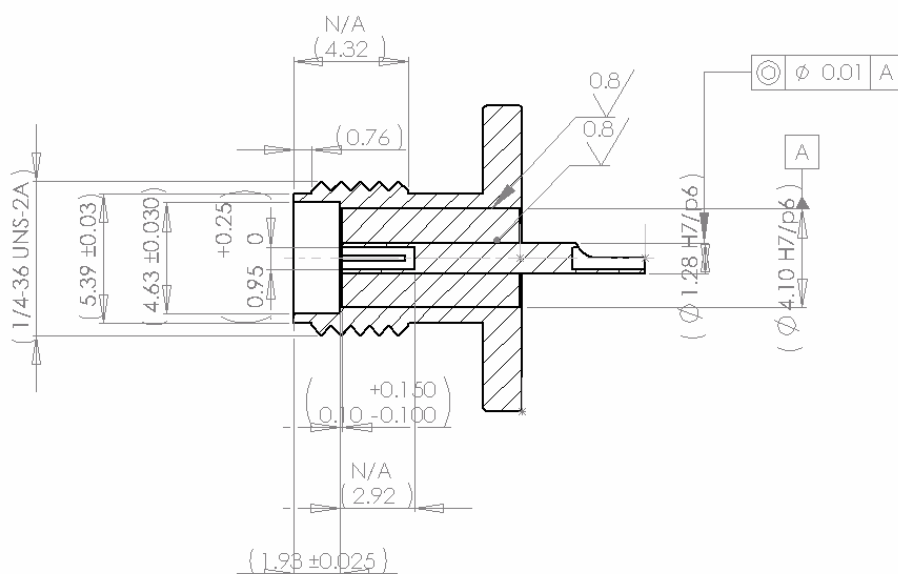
Required dimensions and tolerances for standard female SMA connector.
